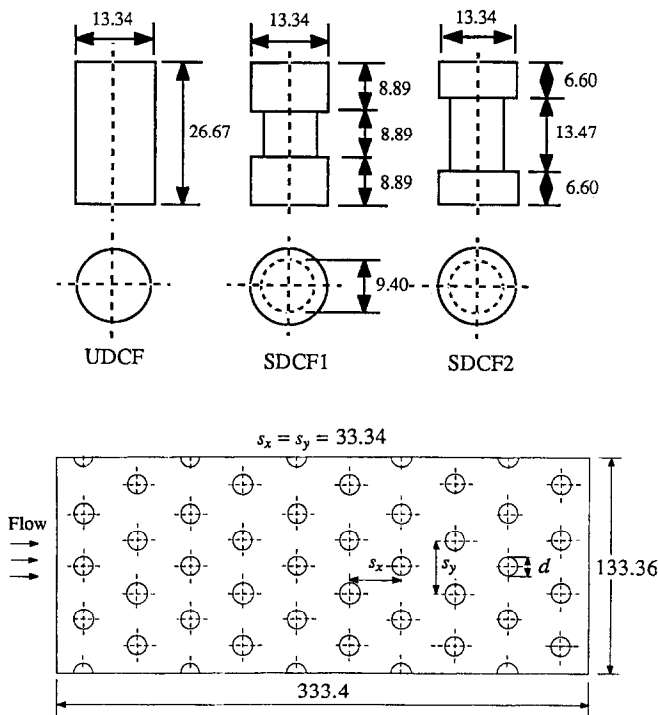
Fin shapes and array configuration (dimensions in mm).
